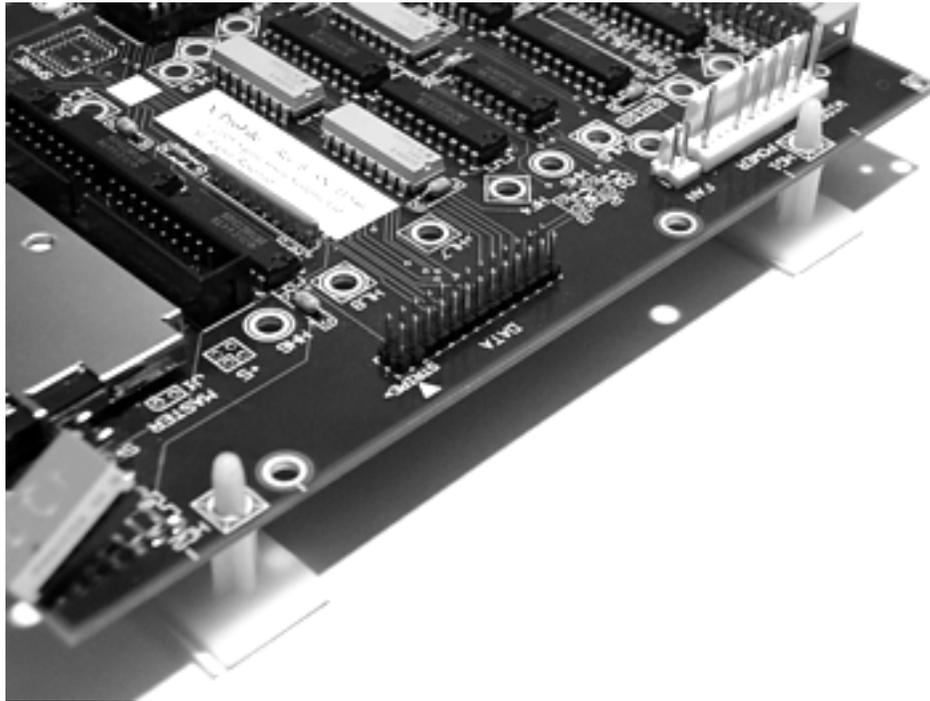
Nylon mounting posts inserted in holes HG1 and HG2
